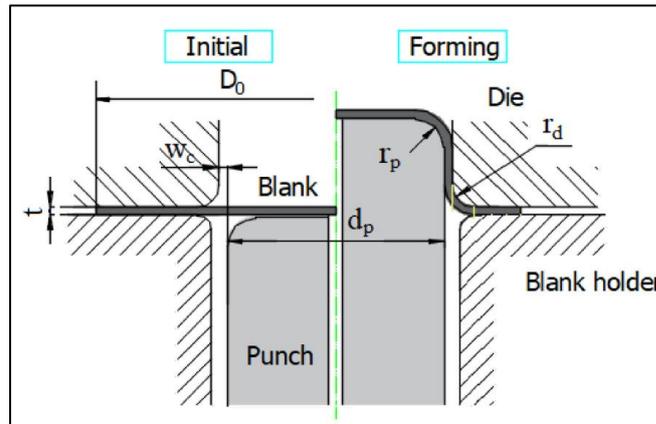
Geometry of deep drawing assembly; r_p – Punch radius; r_d – die corner radius; w_c – Clearance between punch and die
